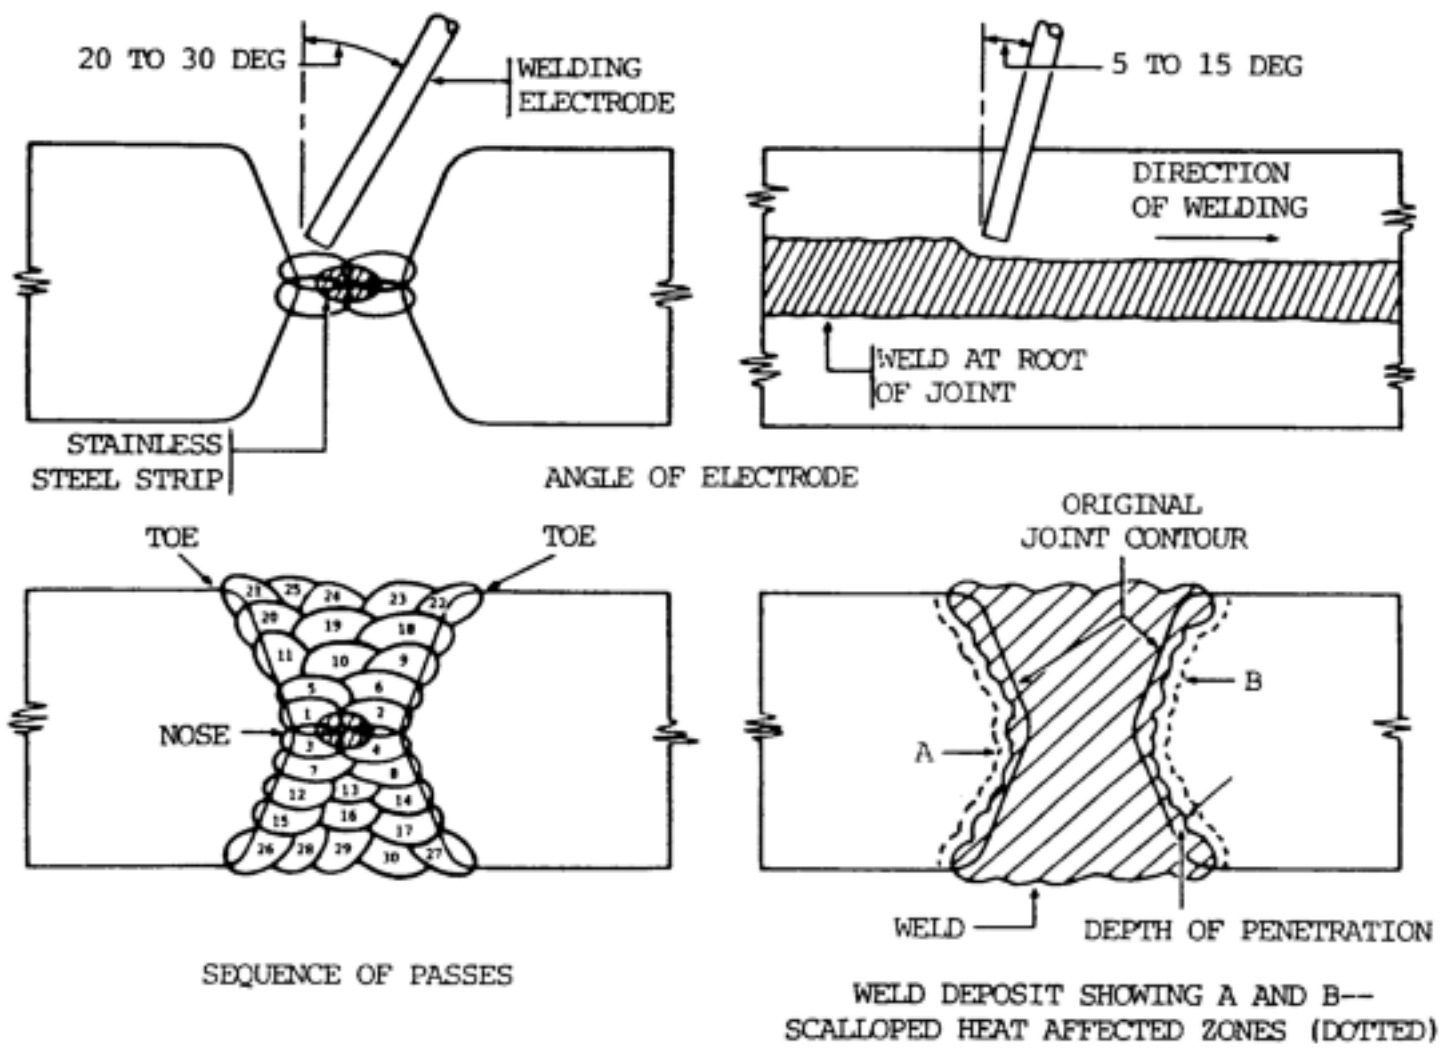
Double V weld on homogeneous armor plate.
